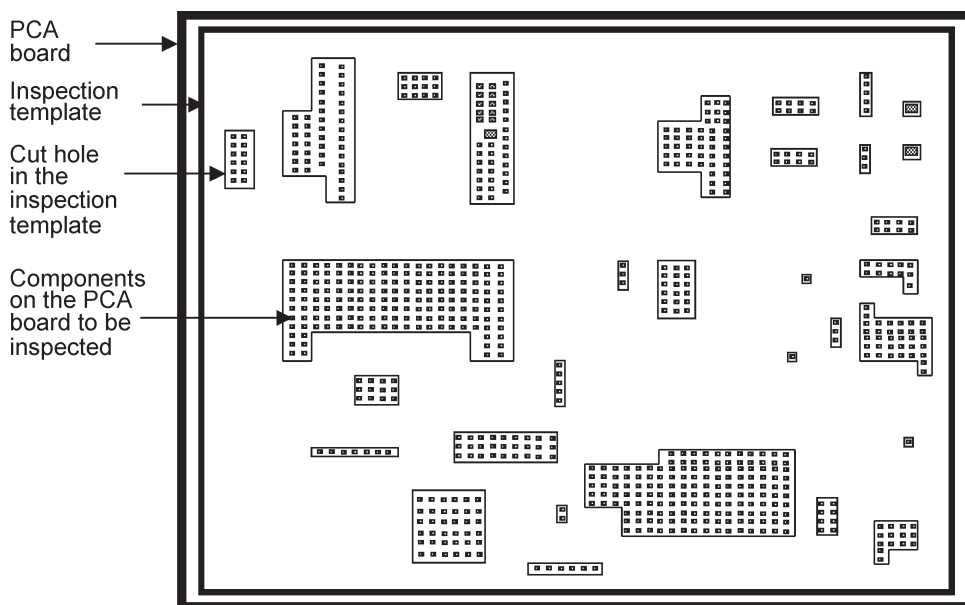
Visual inspection was performed by scanning randomly. Notes. PCA—printed circuit assembly.
